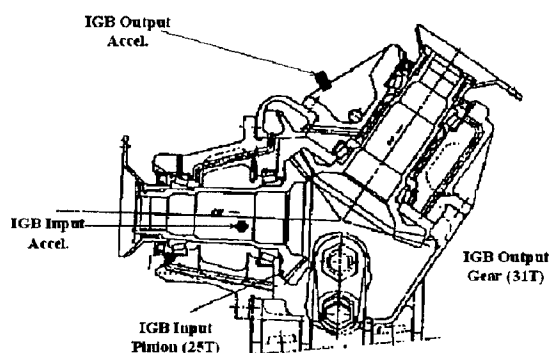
SH-60 Intermediate Gearbox Cutaway.
